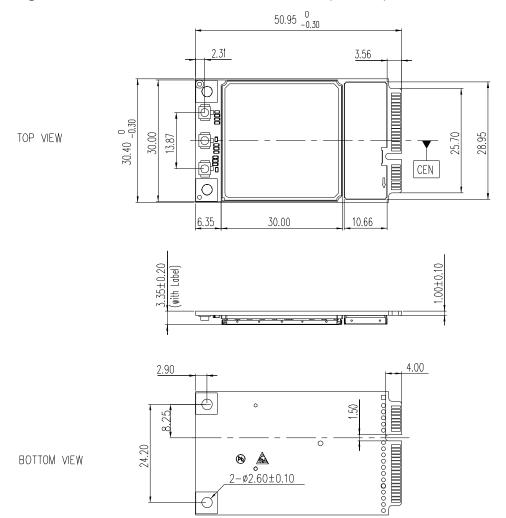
Dimensions of the ME909u-521 module (unit: mm)
